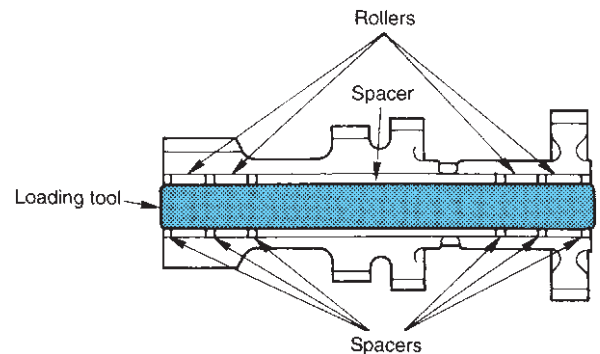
A loading tool should be used to hold the needle bearings and spacers in position while the cluster gear is installed in the transmission. The loading tool is a shaft that is the same diameter as the countershaft and the same length as the cluster gear.
